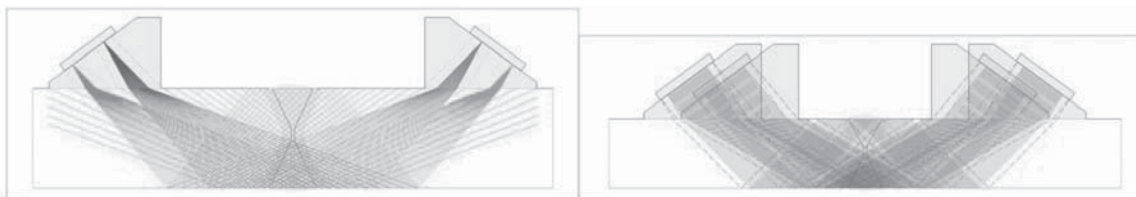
THIN BUTT WELD (S- AND E-SCANS)
